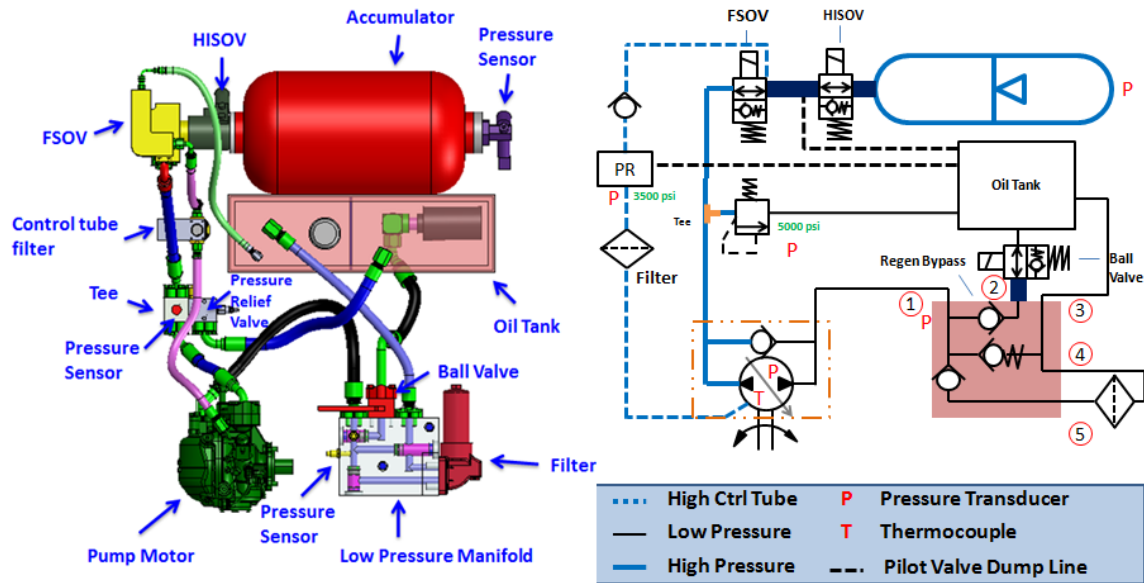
Hydraulic assembly in 3D (left) and hydraulic system layout (right).
